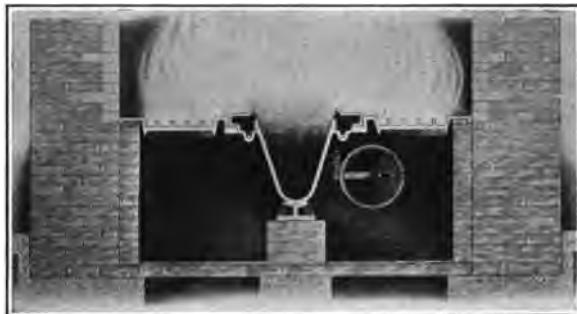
Sectional Front View Jones Single Retort Underfeed Stoker with Side Plates.
